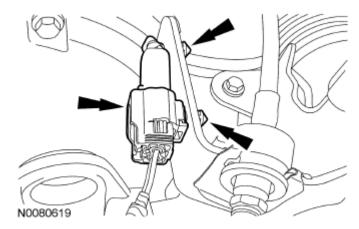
Identifying Clutch Hydraulic Line Courtesy of FORD MOTOR CO.
